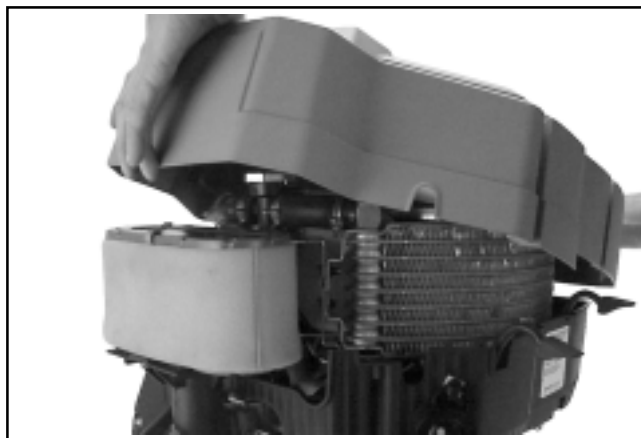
Removing Upper Blower Housing and Screen Assembly.
